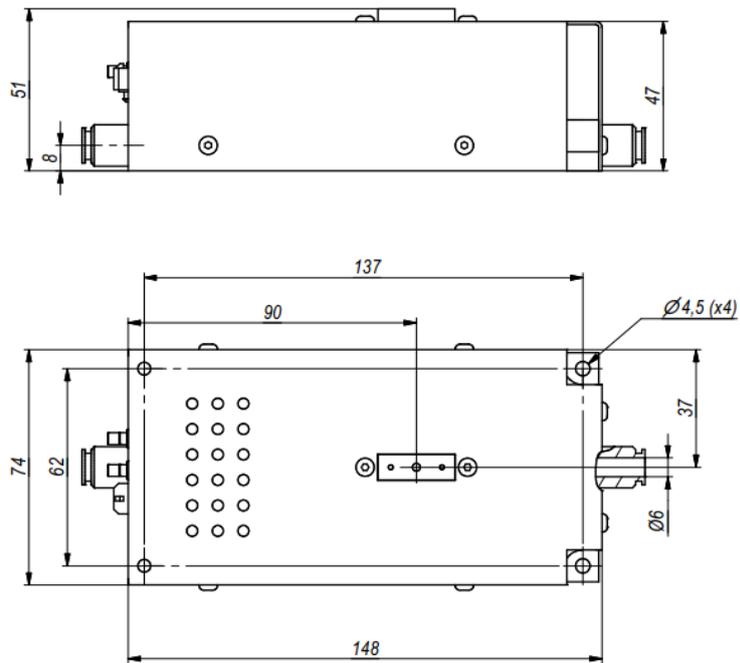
Outline drawing and dimensions of the drivers -AI
